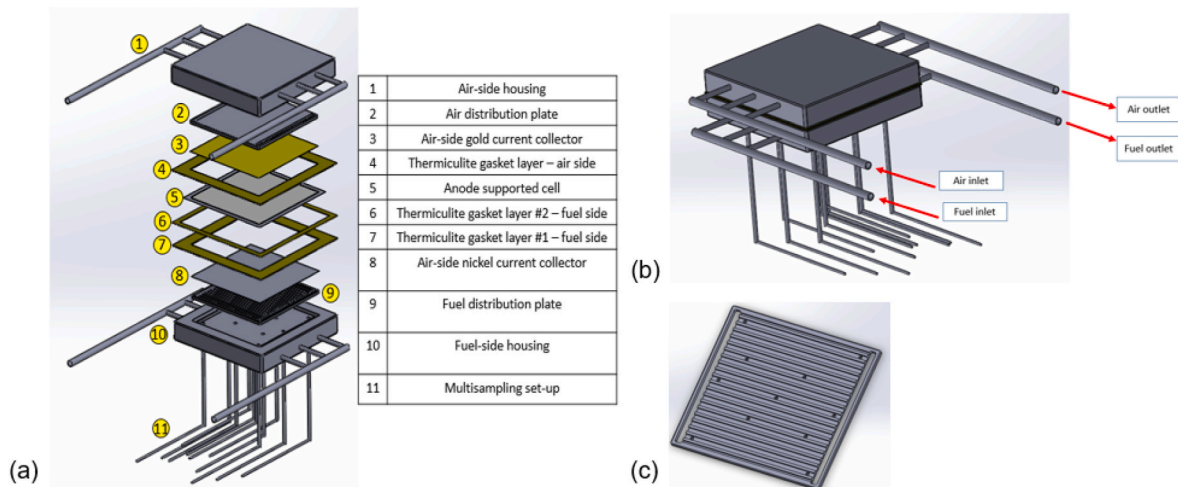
Exploded view of the test setup (a); Exploded view of the test setup – focus on the gas flows (b); fuel-side gas distribution plate (c).
